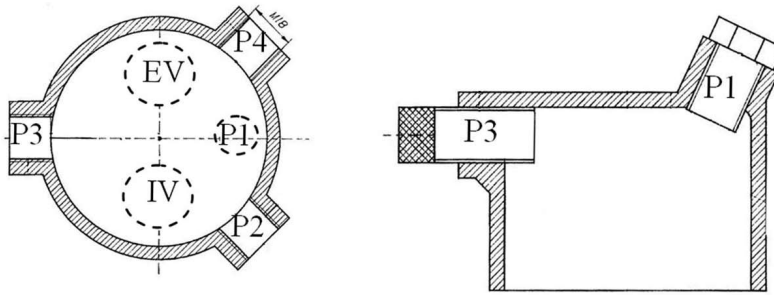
Cross-section of the CFR engine, P1: spark plug, P1-P4: sensor positions, IV: intake valve, EV: exhaust valve
